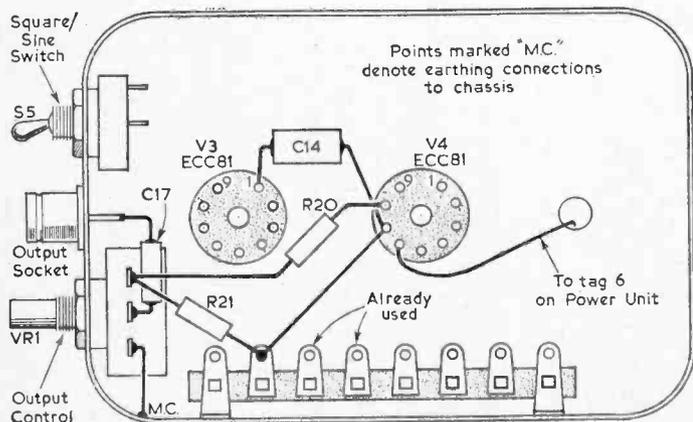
The wiring of the cathode follower stage—only wiring additional to Fig. 17 is shown.
